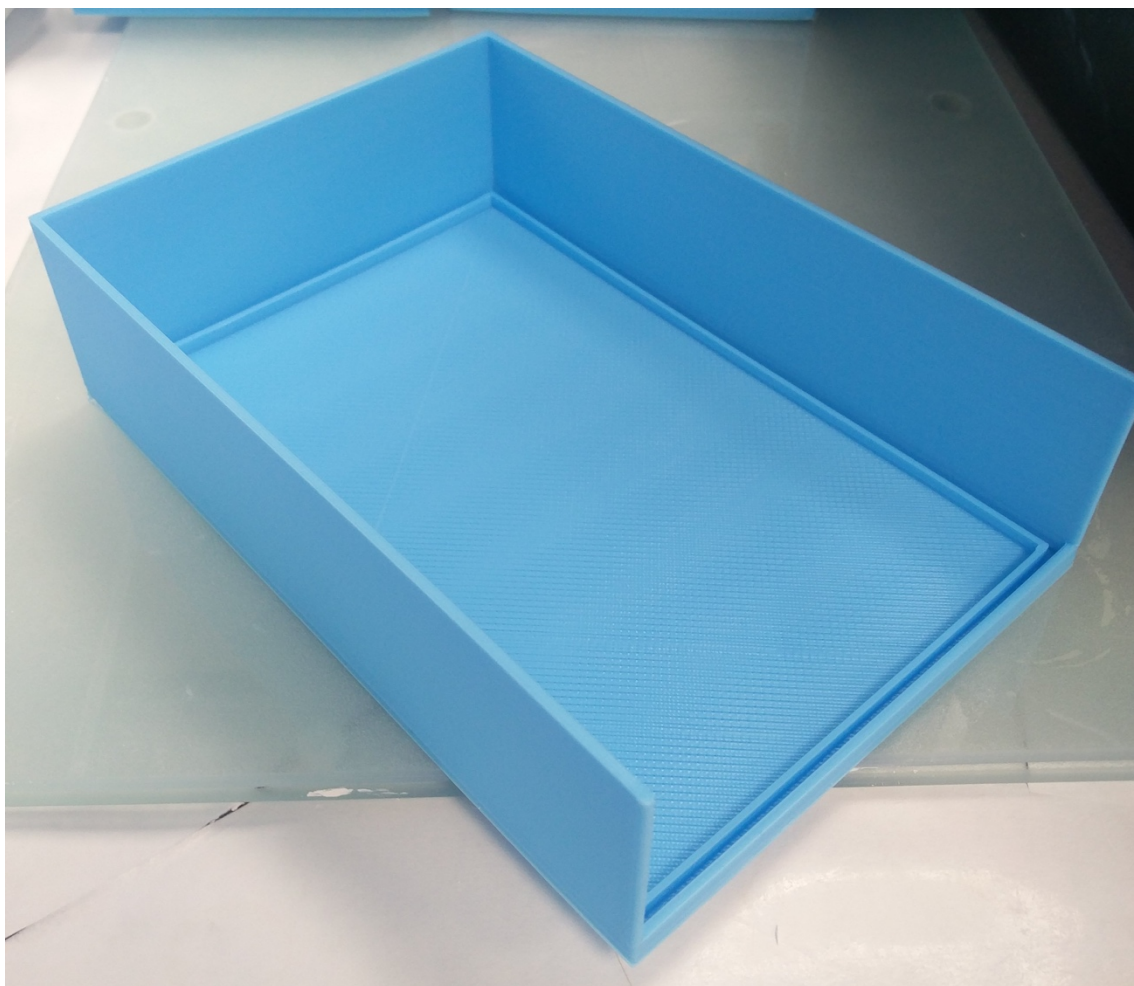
Membrane casting mould (dimensions: 10 x 20 cm)
